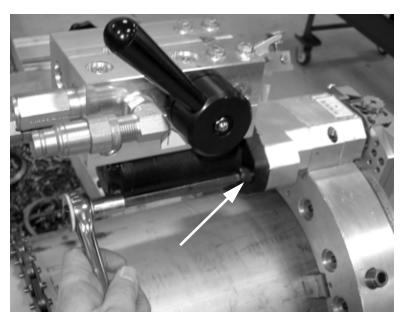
Tighten the 2 screws holding the drive to the adapter.
